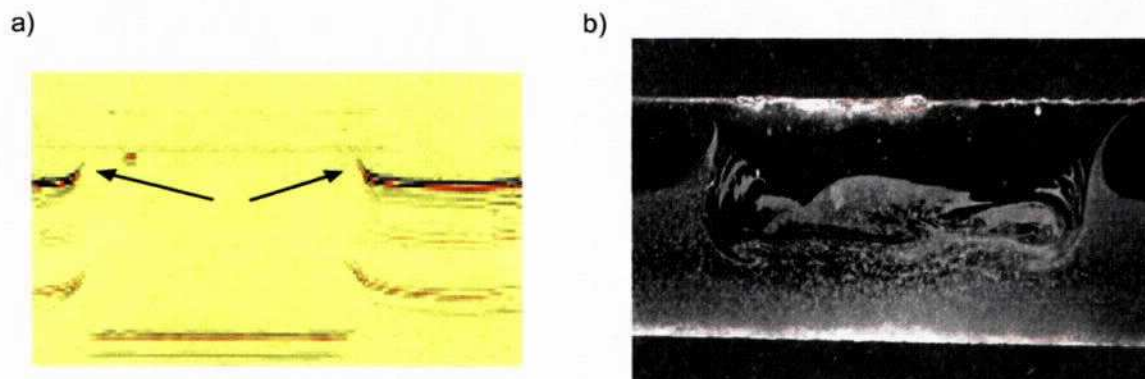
Cross-section of a first lap joint with the presence of hooking. Welding parameters: truncated pin, welding speed of 500 mm/min, spindle speed of 800 RPM, shoulder penetration of 0.1 mm. a) SAFT image obtained by immersion on the weld side and b) corresponding metallography.
